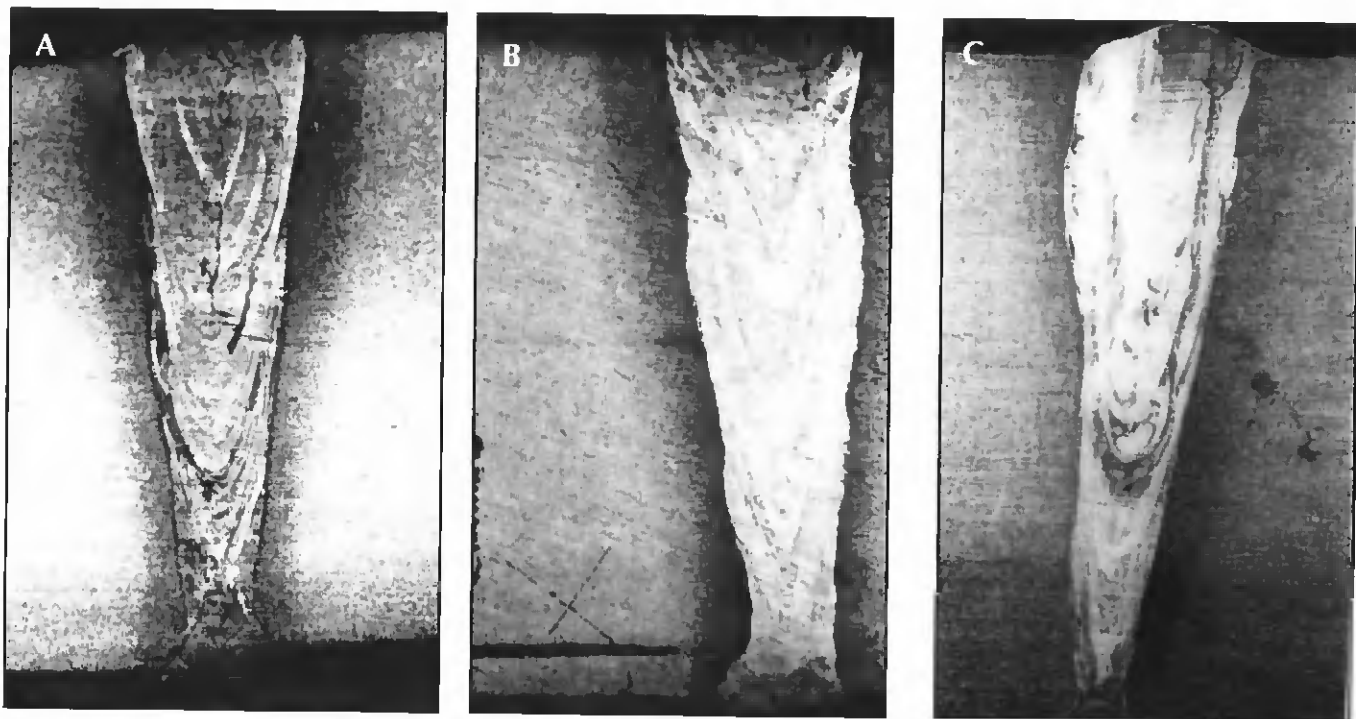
Macrograph of welds with square edge preparation: A — root opening = 0; B — root opening = 0.2 mm; C — root opening = 0.4 mm.
